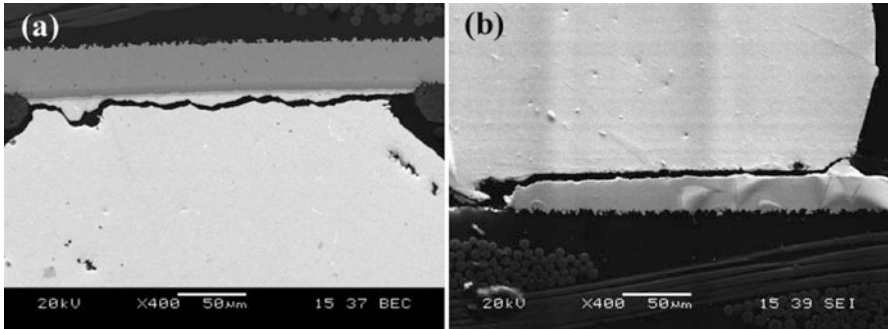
Solder joint failure subject to (a) TC, failure in SAC solder near component interface and (b) Drop impact, failure in IMC at PCB side
